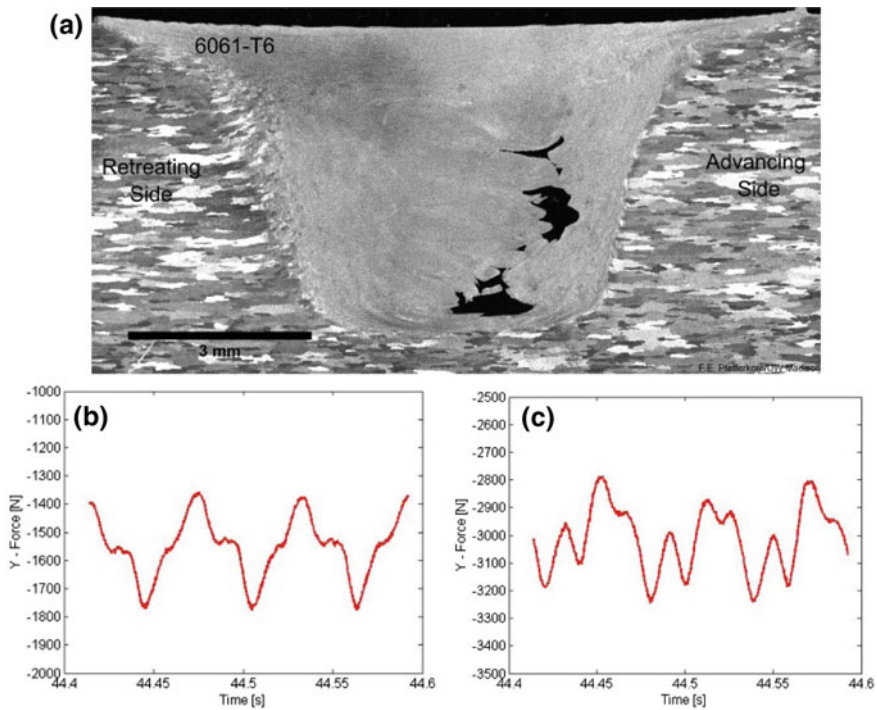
Results of weld at 1,000 rpm and 600 mm/min in alloy 6061-T6: a cross section of weld, b force signal perpendicular to welding direction, c force signal in direction of welding
